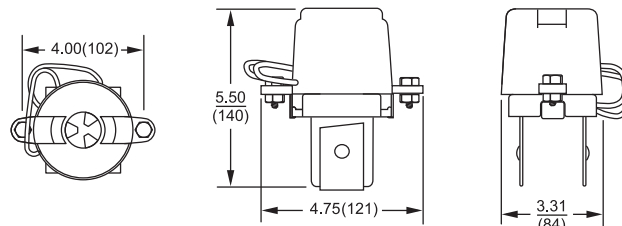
Figure B — Indicator with Attached Sensor. Tie-Wrap Mounting.
